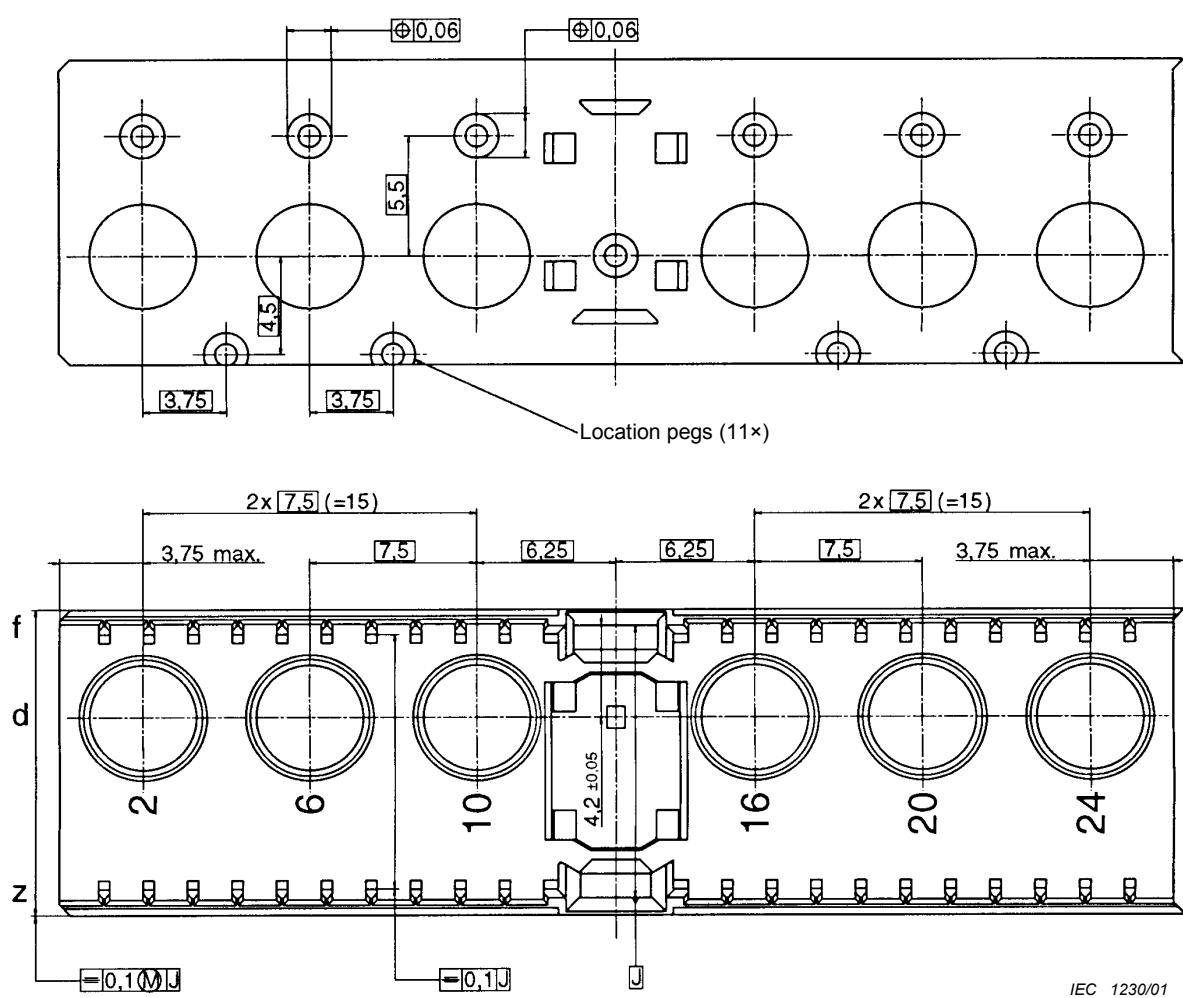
Dimensions of style L, fixed 50 mm mixed module with six special contacts
